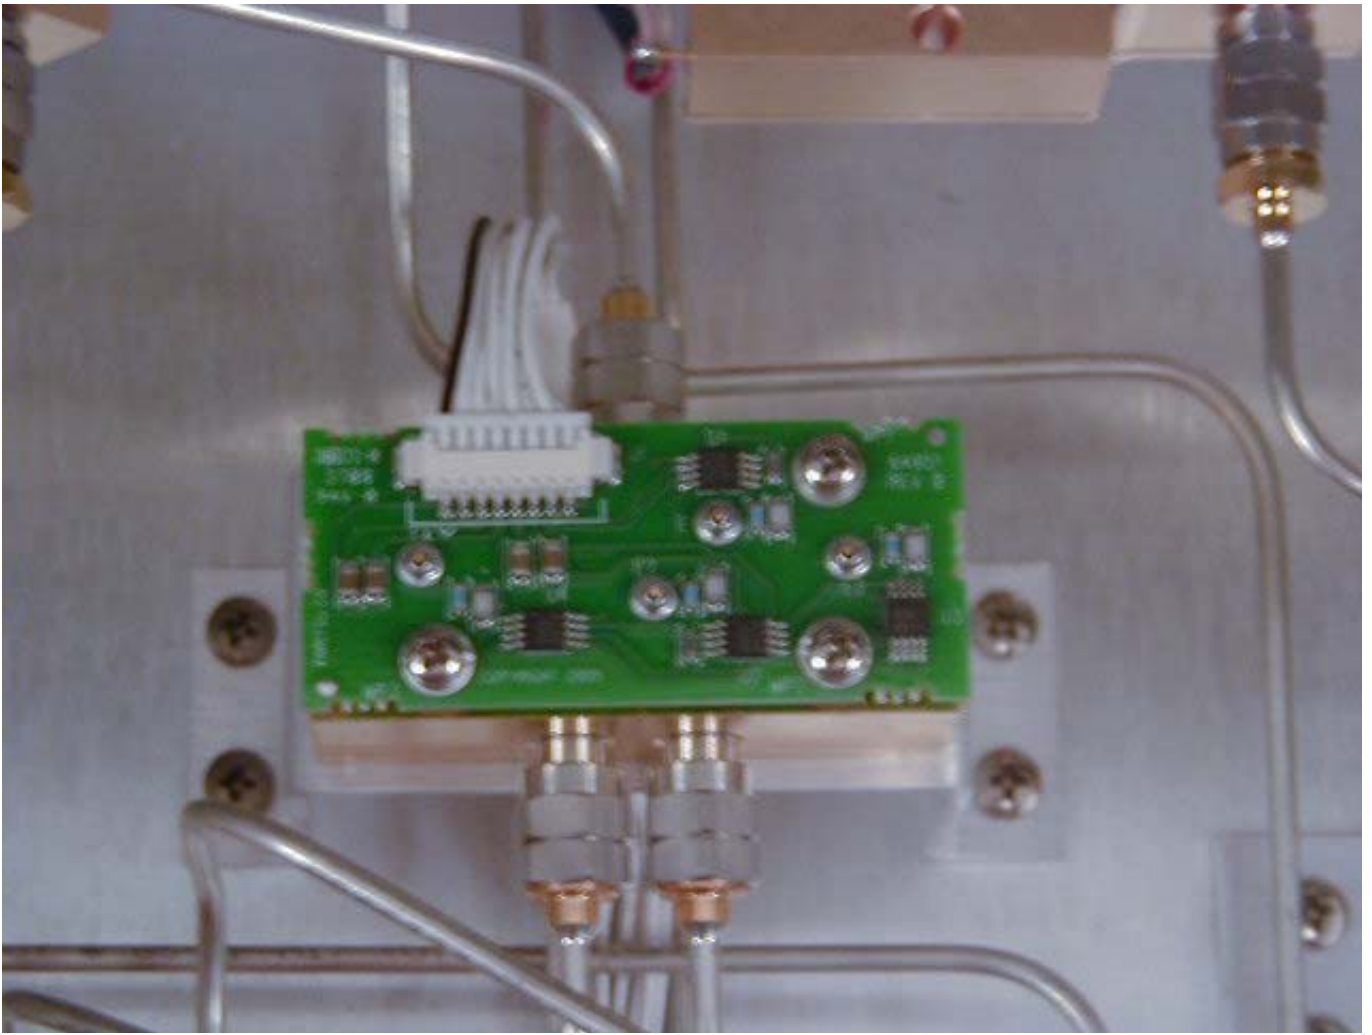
High Band SPDT Switch Control PCB Assembly, High Band SPDT Switch and Bracket
